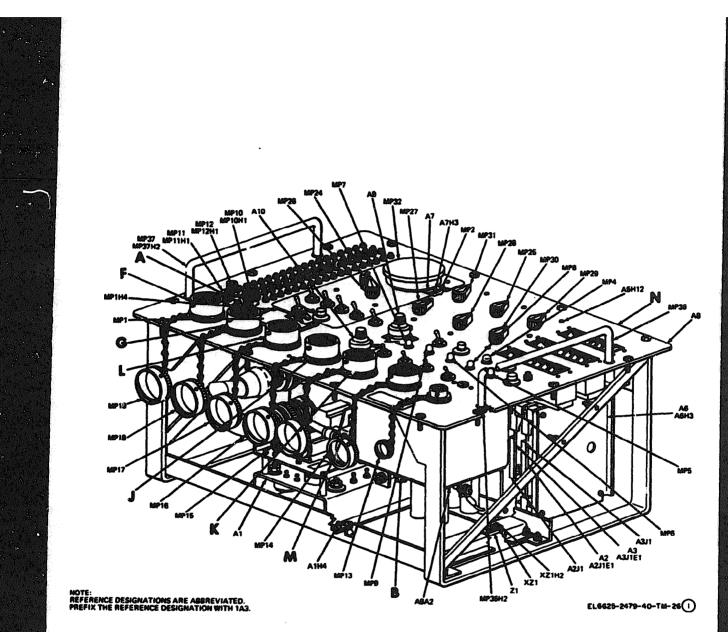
Panel assembly 1A3, parts location (part 1 of 5).
